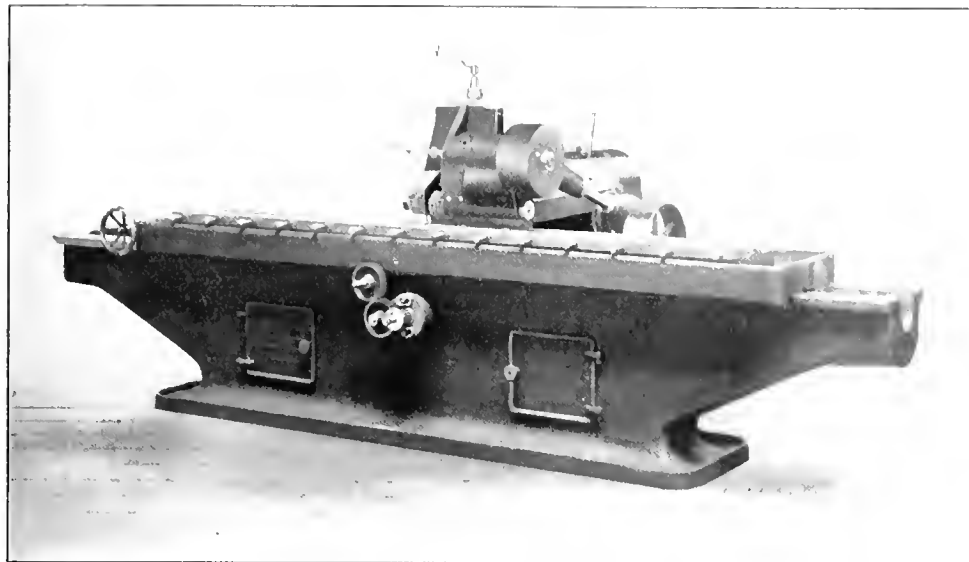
Rack-cutting Machine built in the Shops of the R. K. LeBlond Machine Tool Co.
